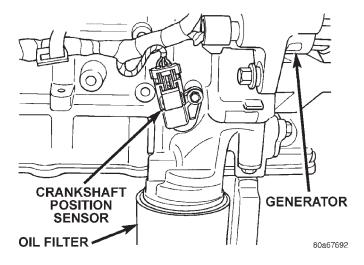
Crankshaft Position Sensor—2.0/2.4L Engines
